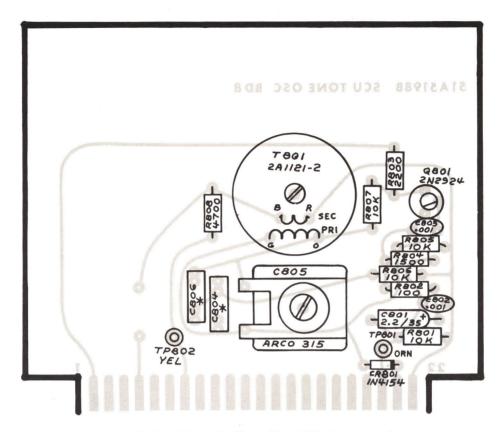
SCU Tone Oscillator (Board 8), Parts Location
